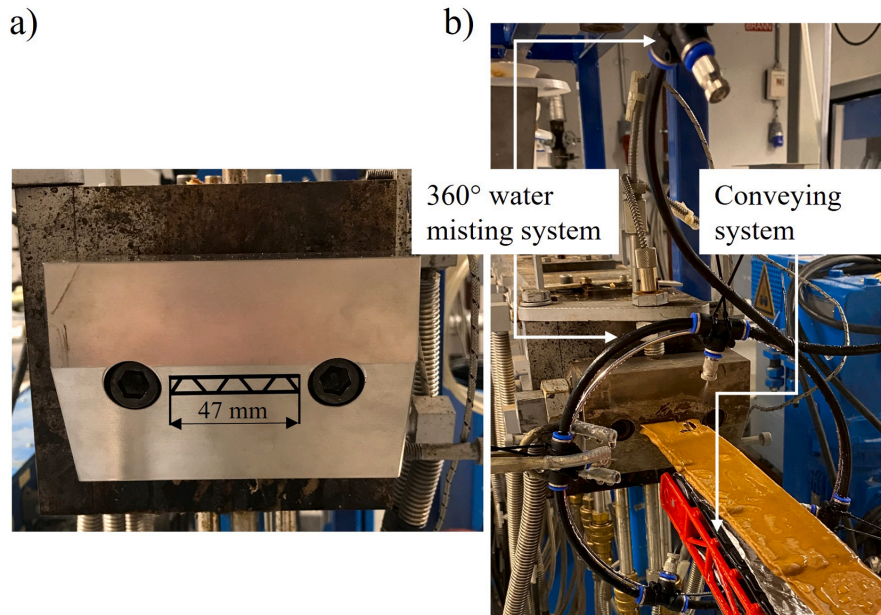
a) Extrusion tool and b) extrusion line set-up with water cooling system and conveyor.
